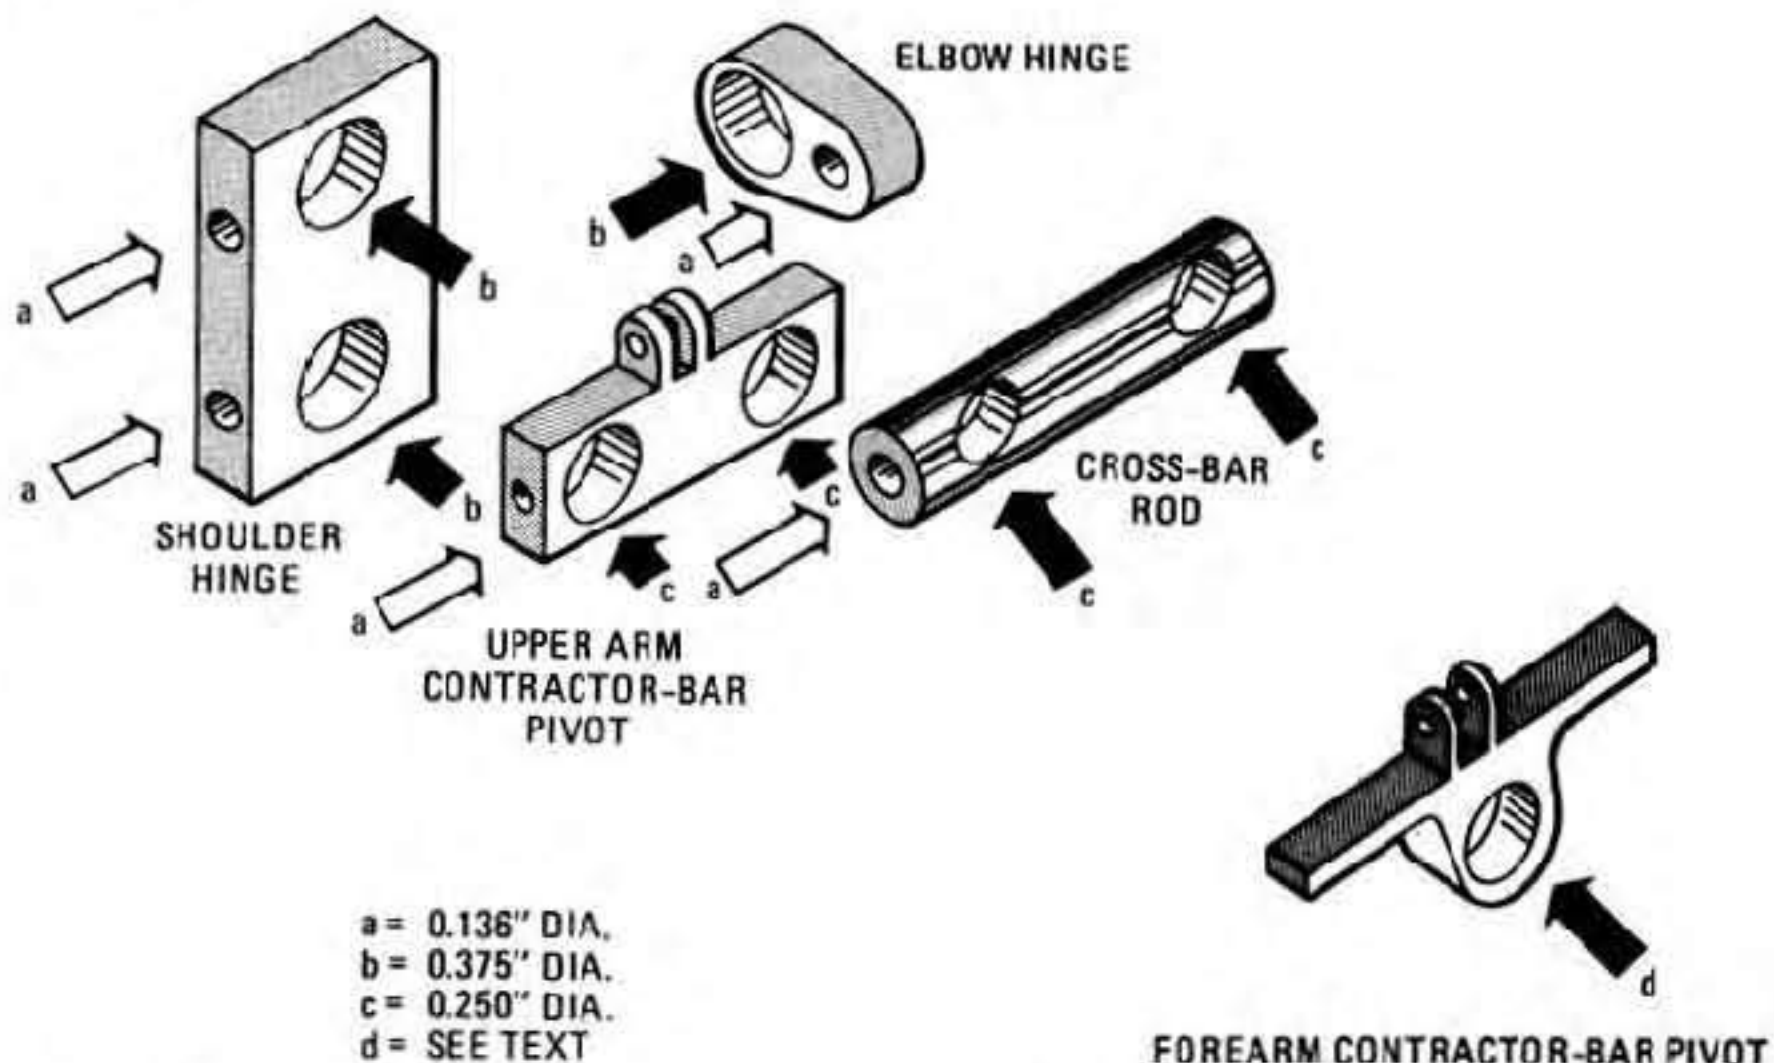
DETAILS of the aluminum parts which must be fabricated. Steel cross-bar rod is also shown as an example. Note that there are several different versions of this part.
